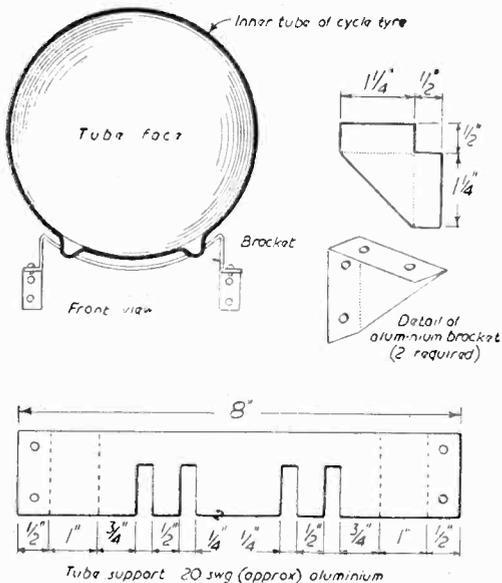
Details of the C.R.T. chassis for 9in. or 12in. tube.
